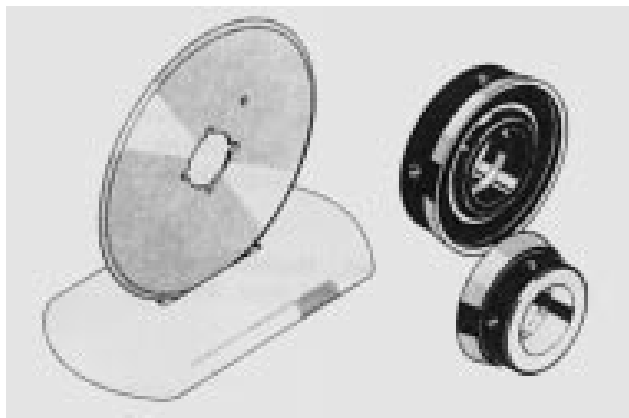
Principles of rotary blade cutting (left) and rotary blade shearing (right).
